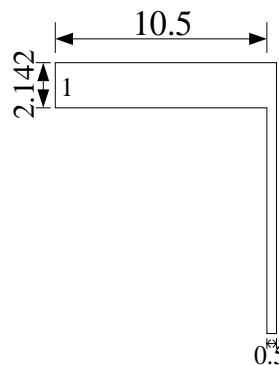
(c) Port Dimensions (all dimensions are in mm).
